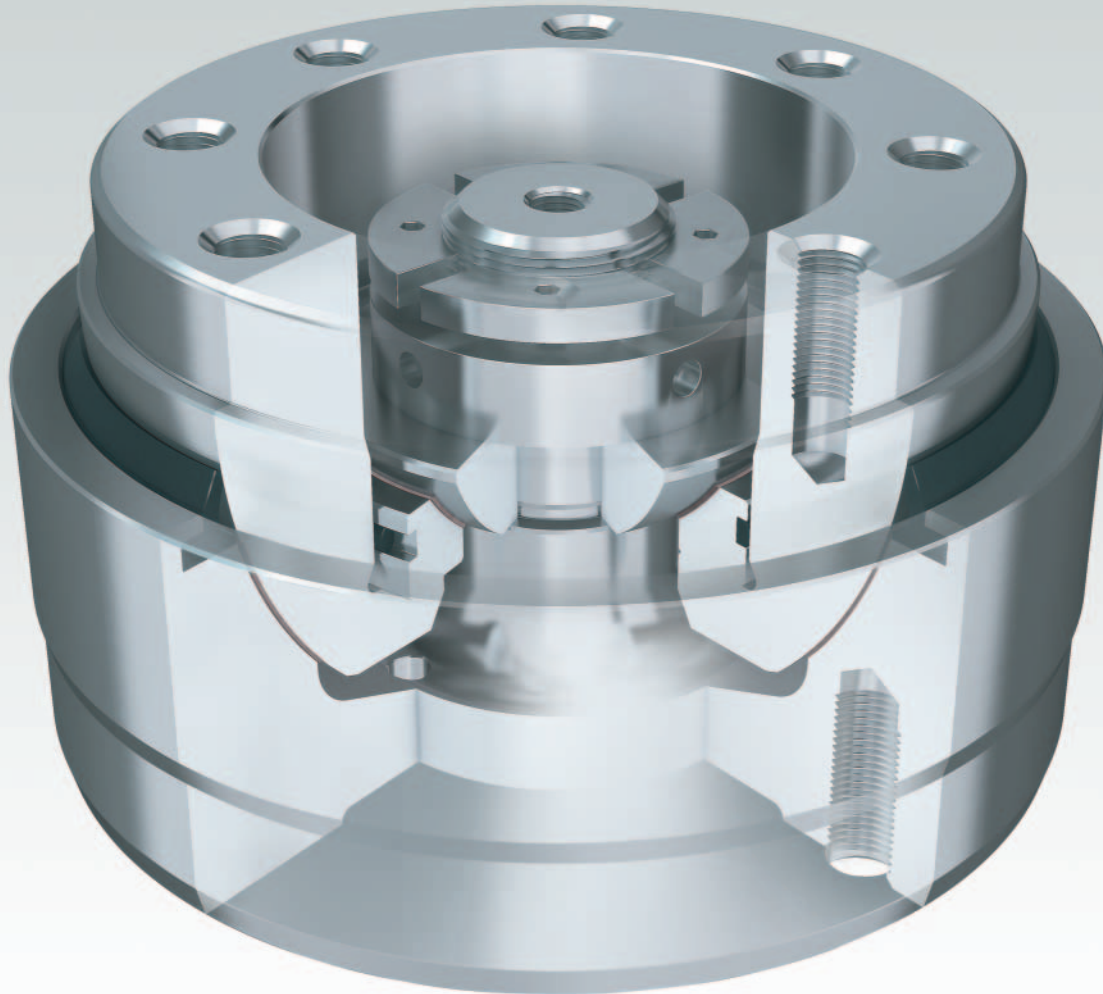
INA spherical plain bearing system for joining tram carriages in low-floor trams
